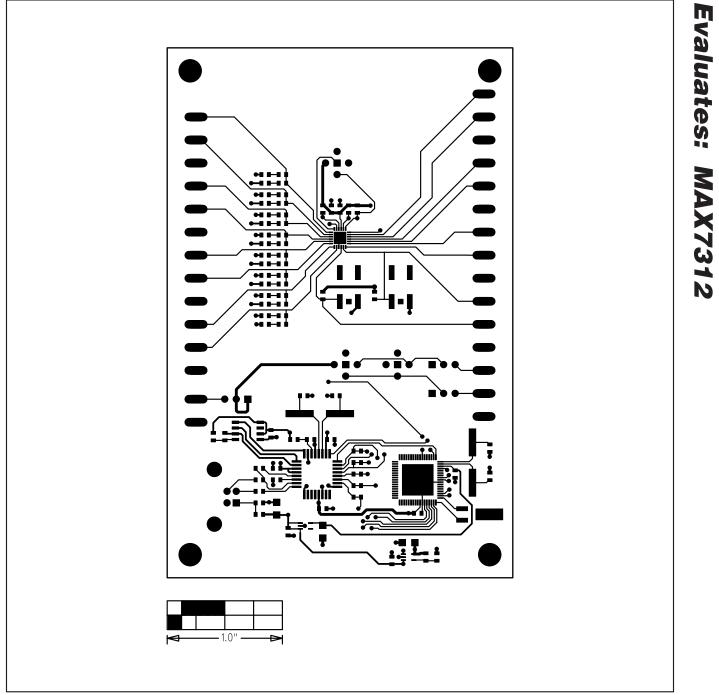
MAX7312 EV Kit PCB Layout—Component Side
